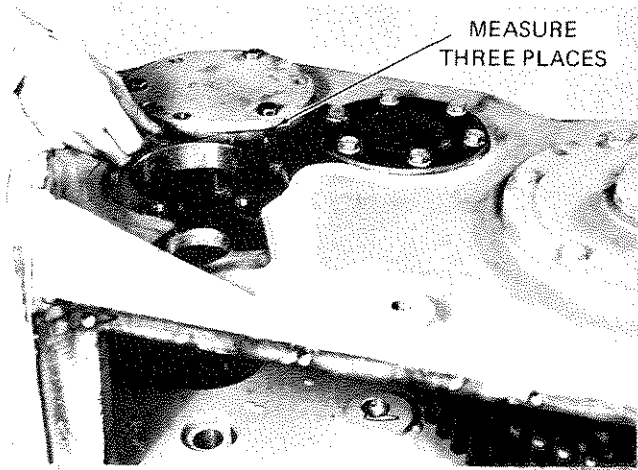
Installation Of Brake Shaft (Sheet 2 of 2)
